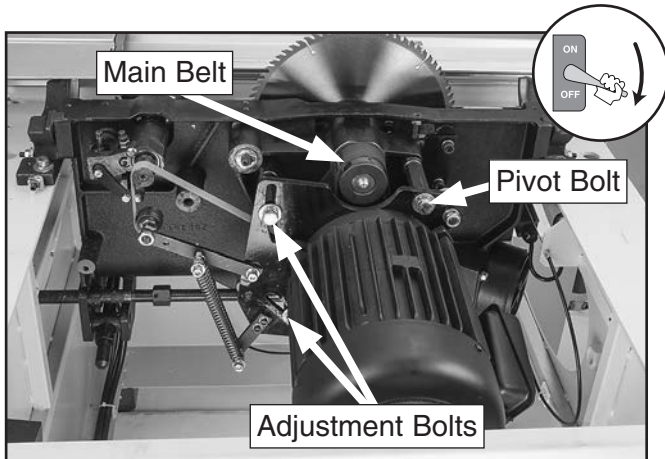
Locations of adjustment and pivot bolts (cast-iron table removed for clarity).
